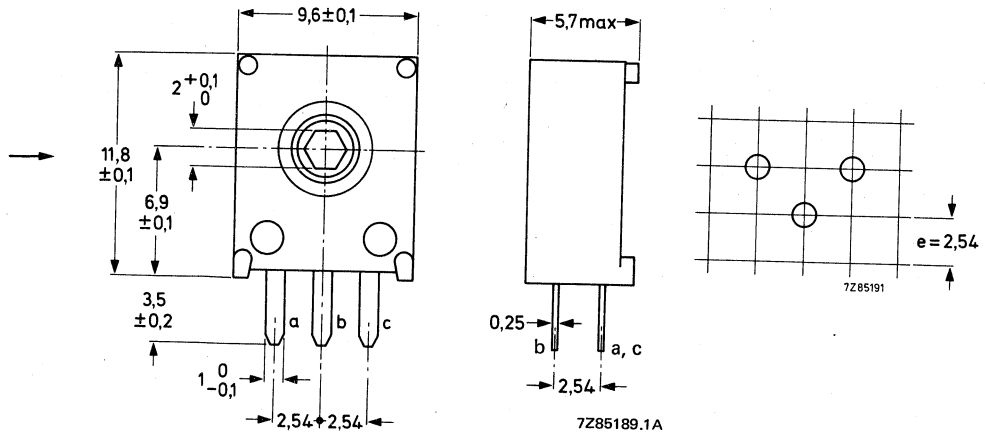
Vertical mounting, version with hexagonal recess (insulated cold wiper, b).
